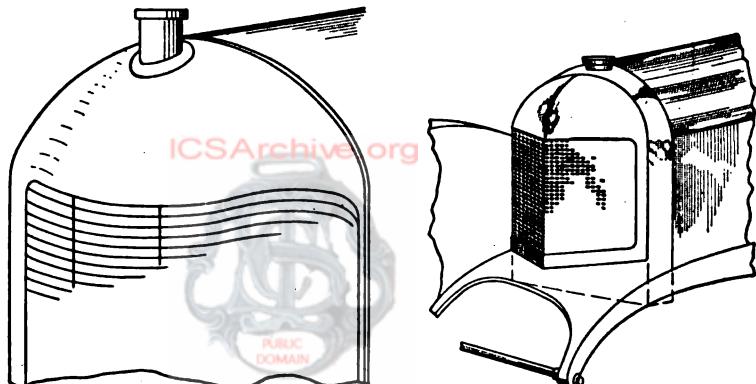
D-Shaped Radiator of the Grant Light Car and V-Shaped Radiator of the Scripps-Booth Light Car
